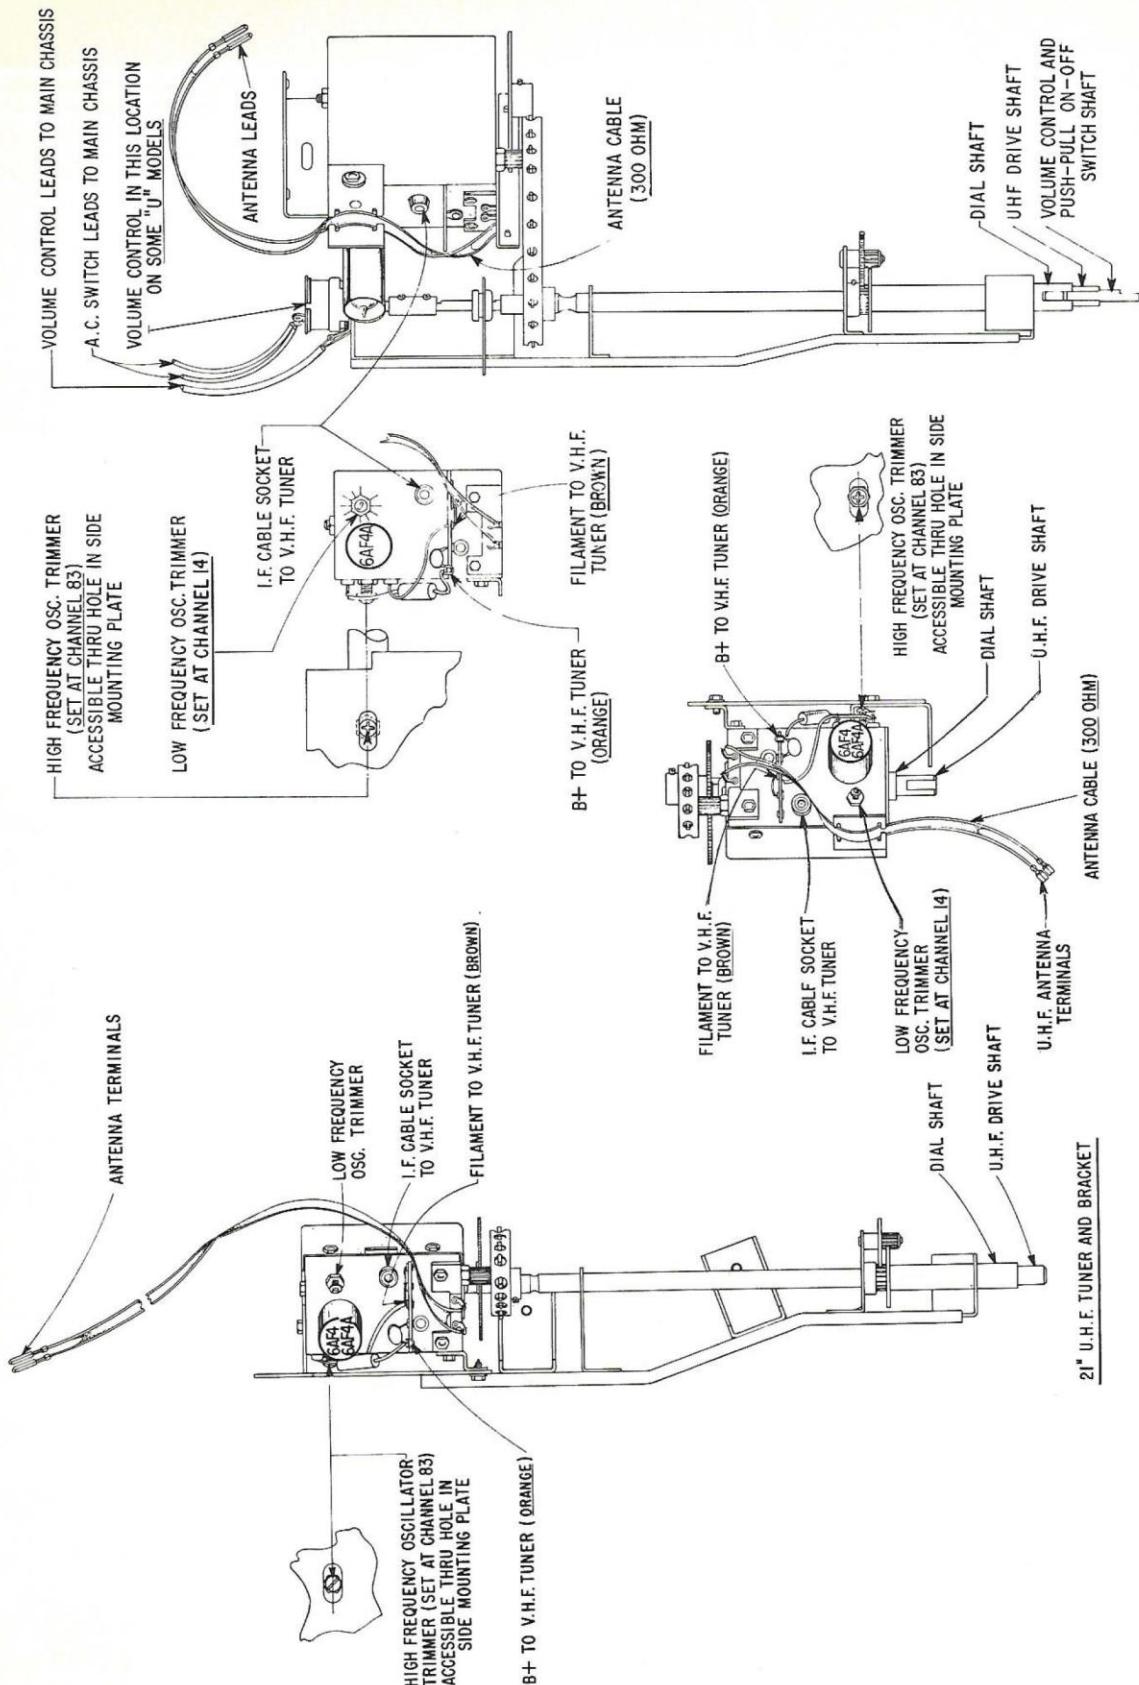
Tube and Trimmer and Mechanical Layout 175-8 UHF Continuous Tuner
